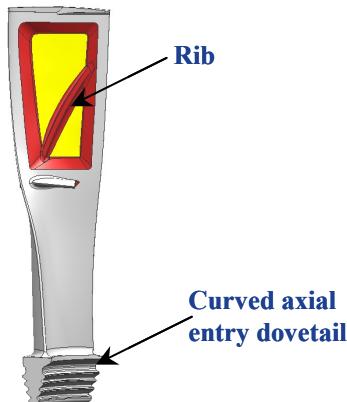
33.5" Advanced Aero Design: Full Blade Machining Detail
